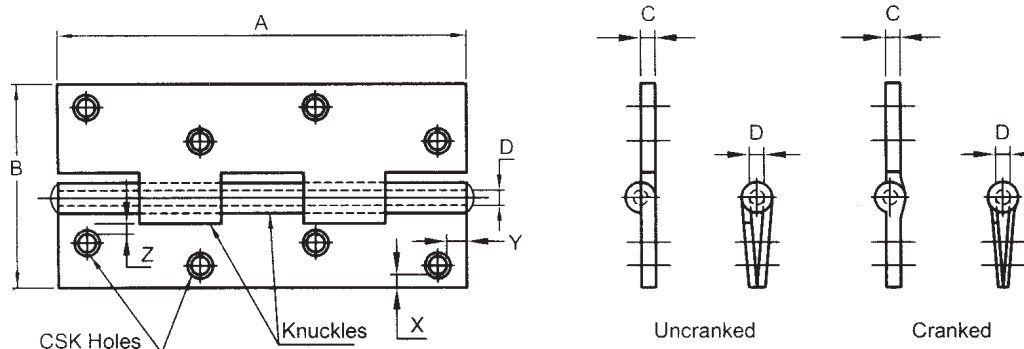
TYPICAL SKETCH FOR LIGHT, MEDIUM AND HEAVY WEIGHT STAINLESS STEEL BUTT HINGES
